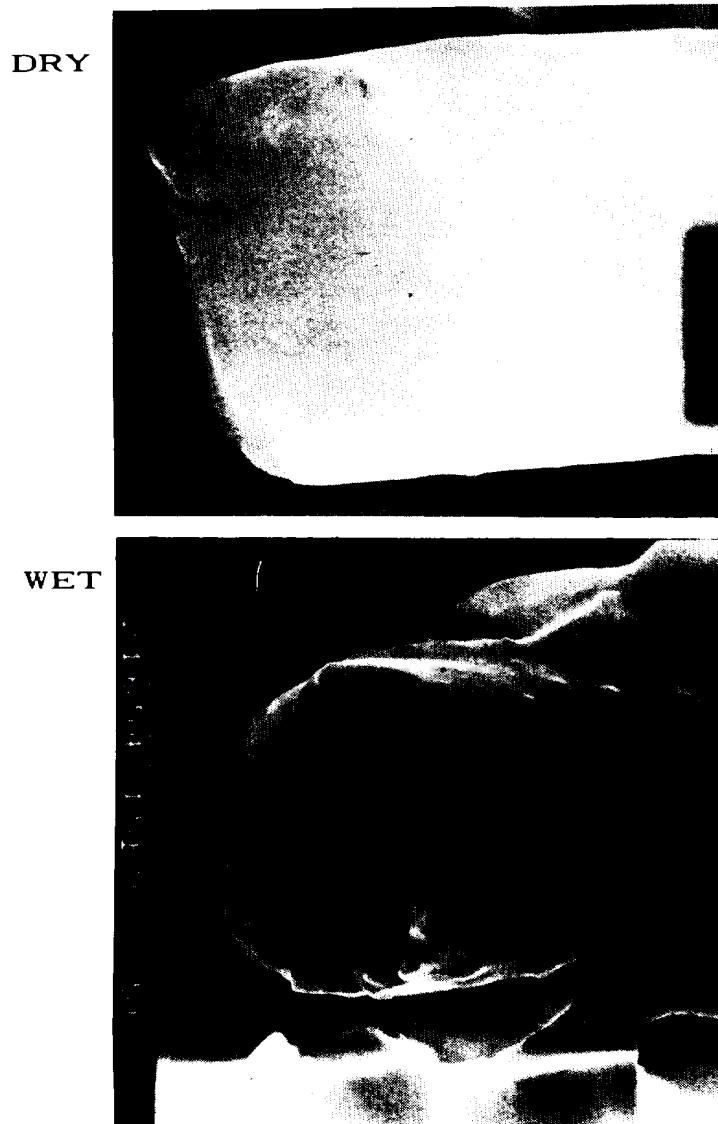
Fractographs of tensile failure in wet and dry specimen(T-1/347).
